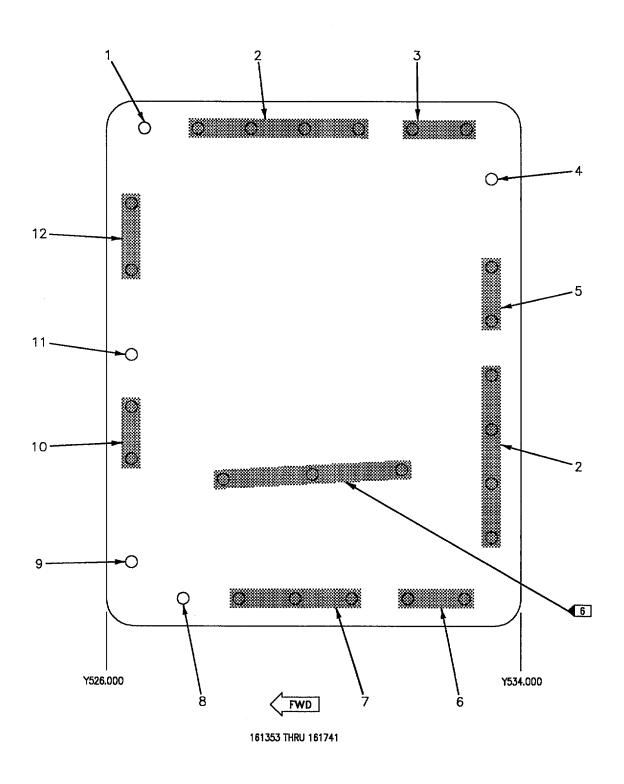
Cover (Door 116) Replacement (Sheet 1)
